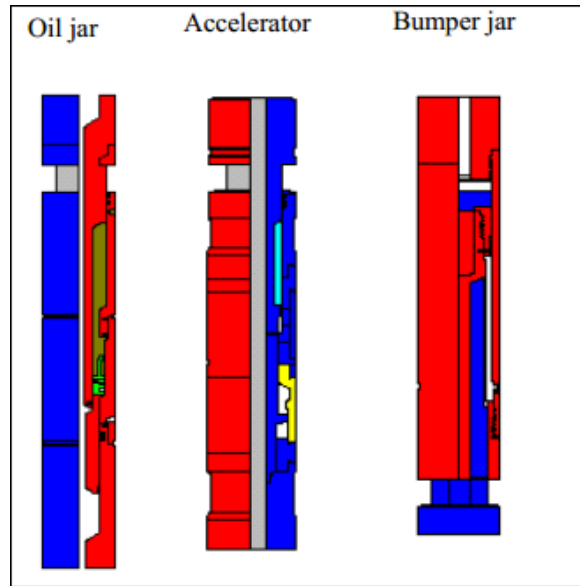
Types of Drilling Jars (Well Engineering and Construction, Rabia).
